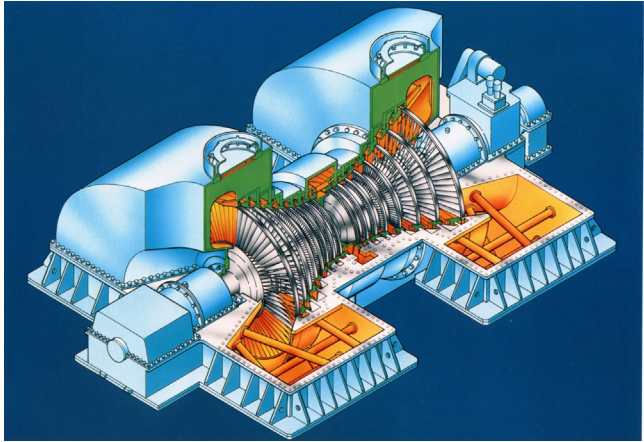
Cut-away view of Darajat Unit 2 steam turbine [22] [WWW].
